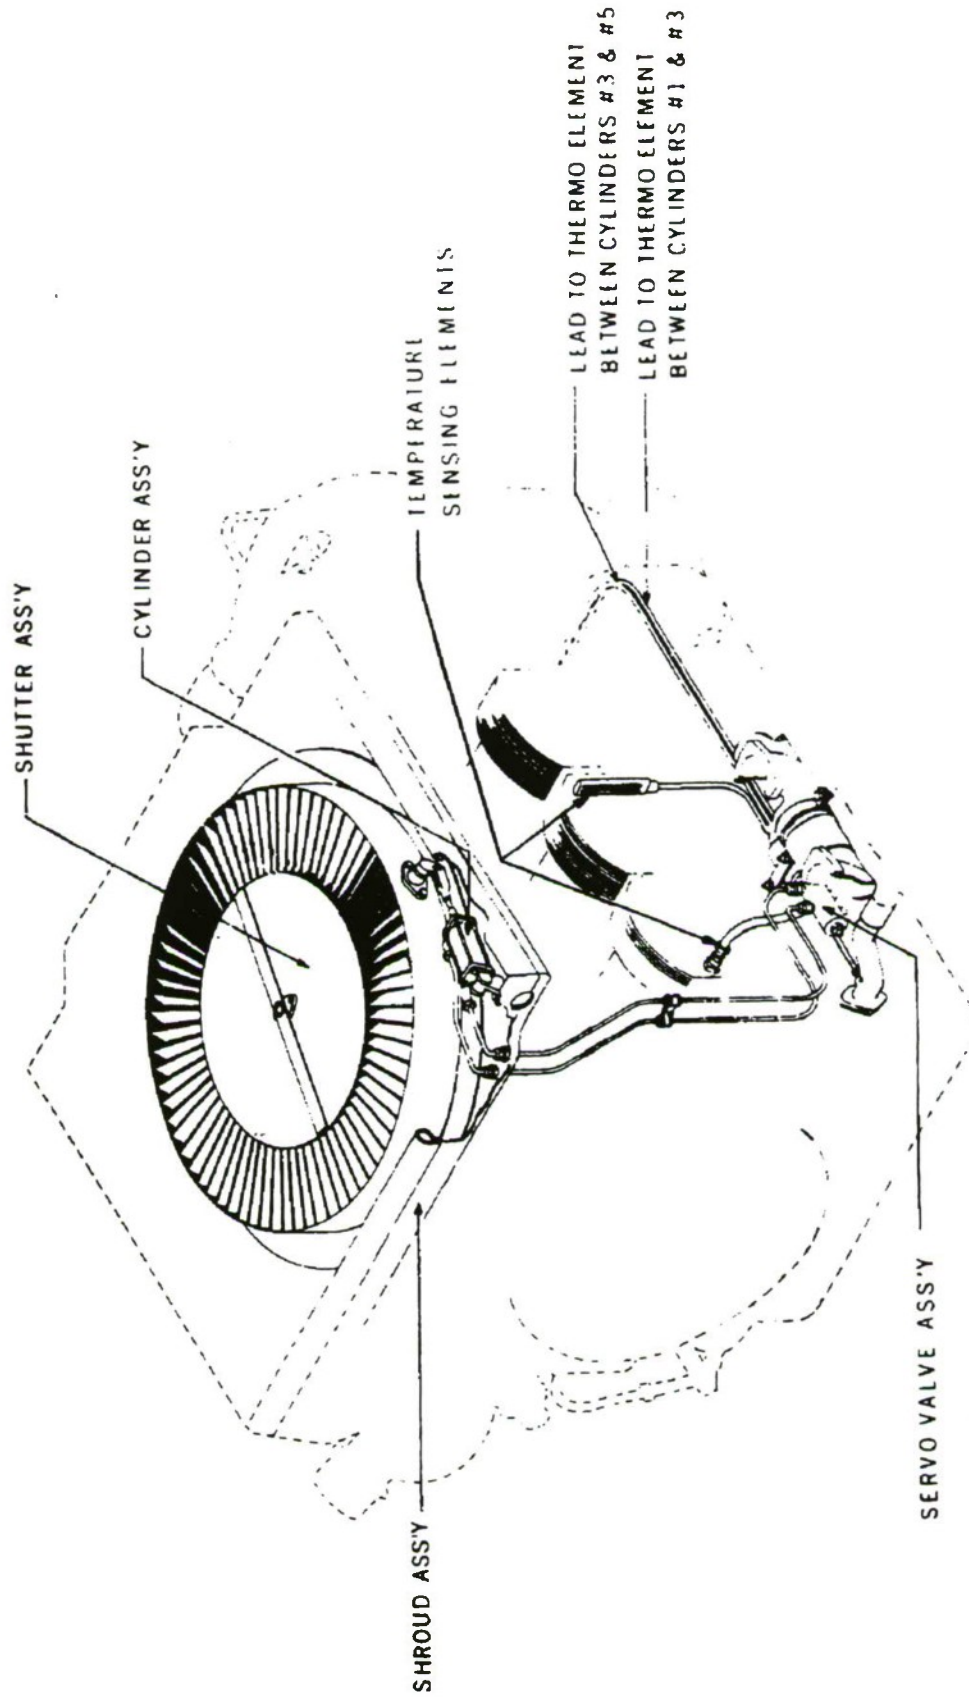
AOS-895-3 Air-Cooled Engine Winterization Shutter Assembly
